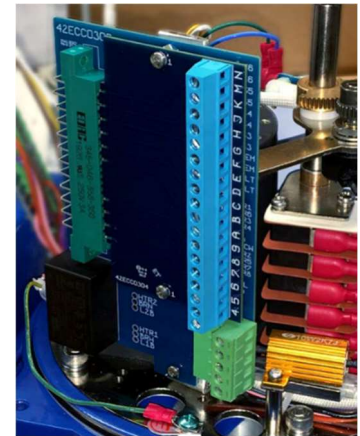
Printed circuit boards (PCB) contain the terminal block. They facilitate simple field wiring and testing.
